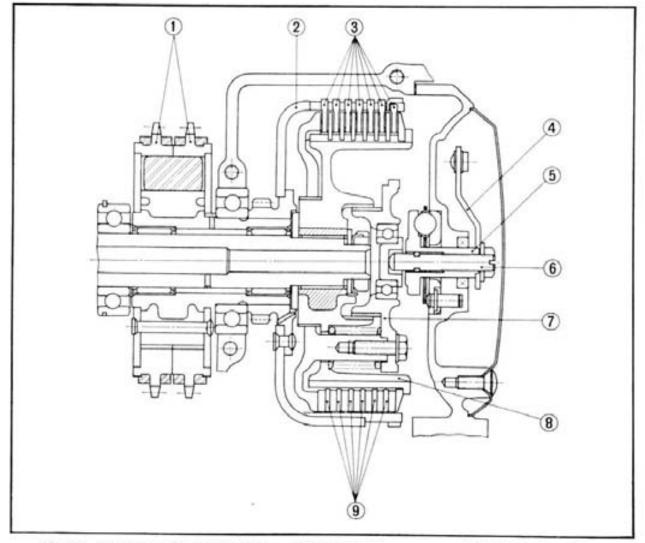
① Primary driven sprocket ② Clutch outer ③ Friction disc
